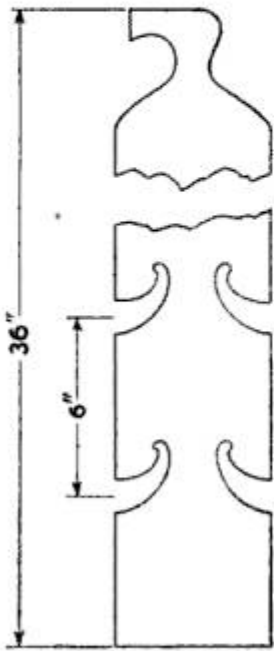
A Section of a Core Print and Flange Made in One Piece on a Faceplate
